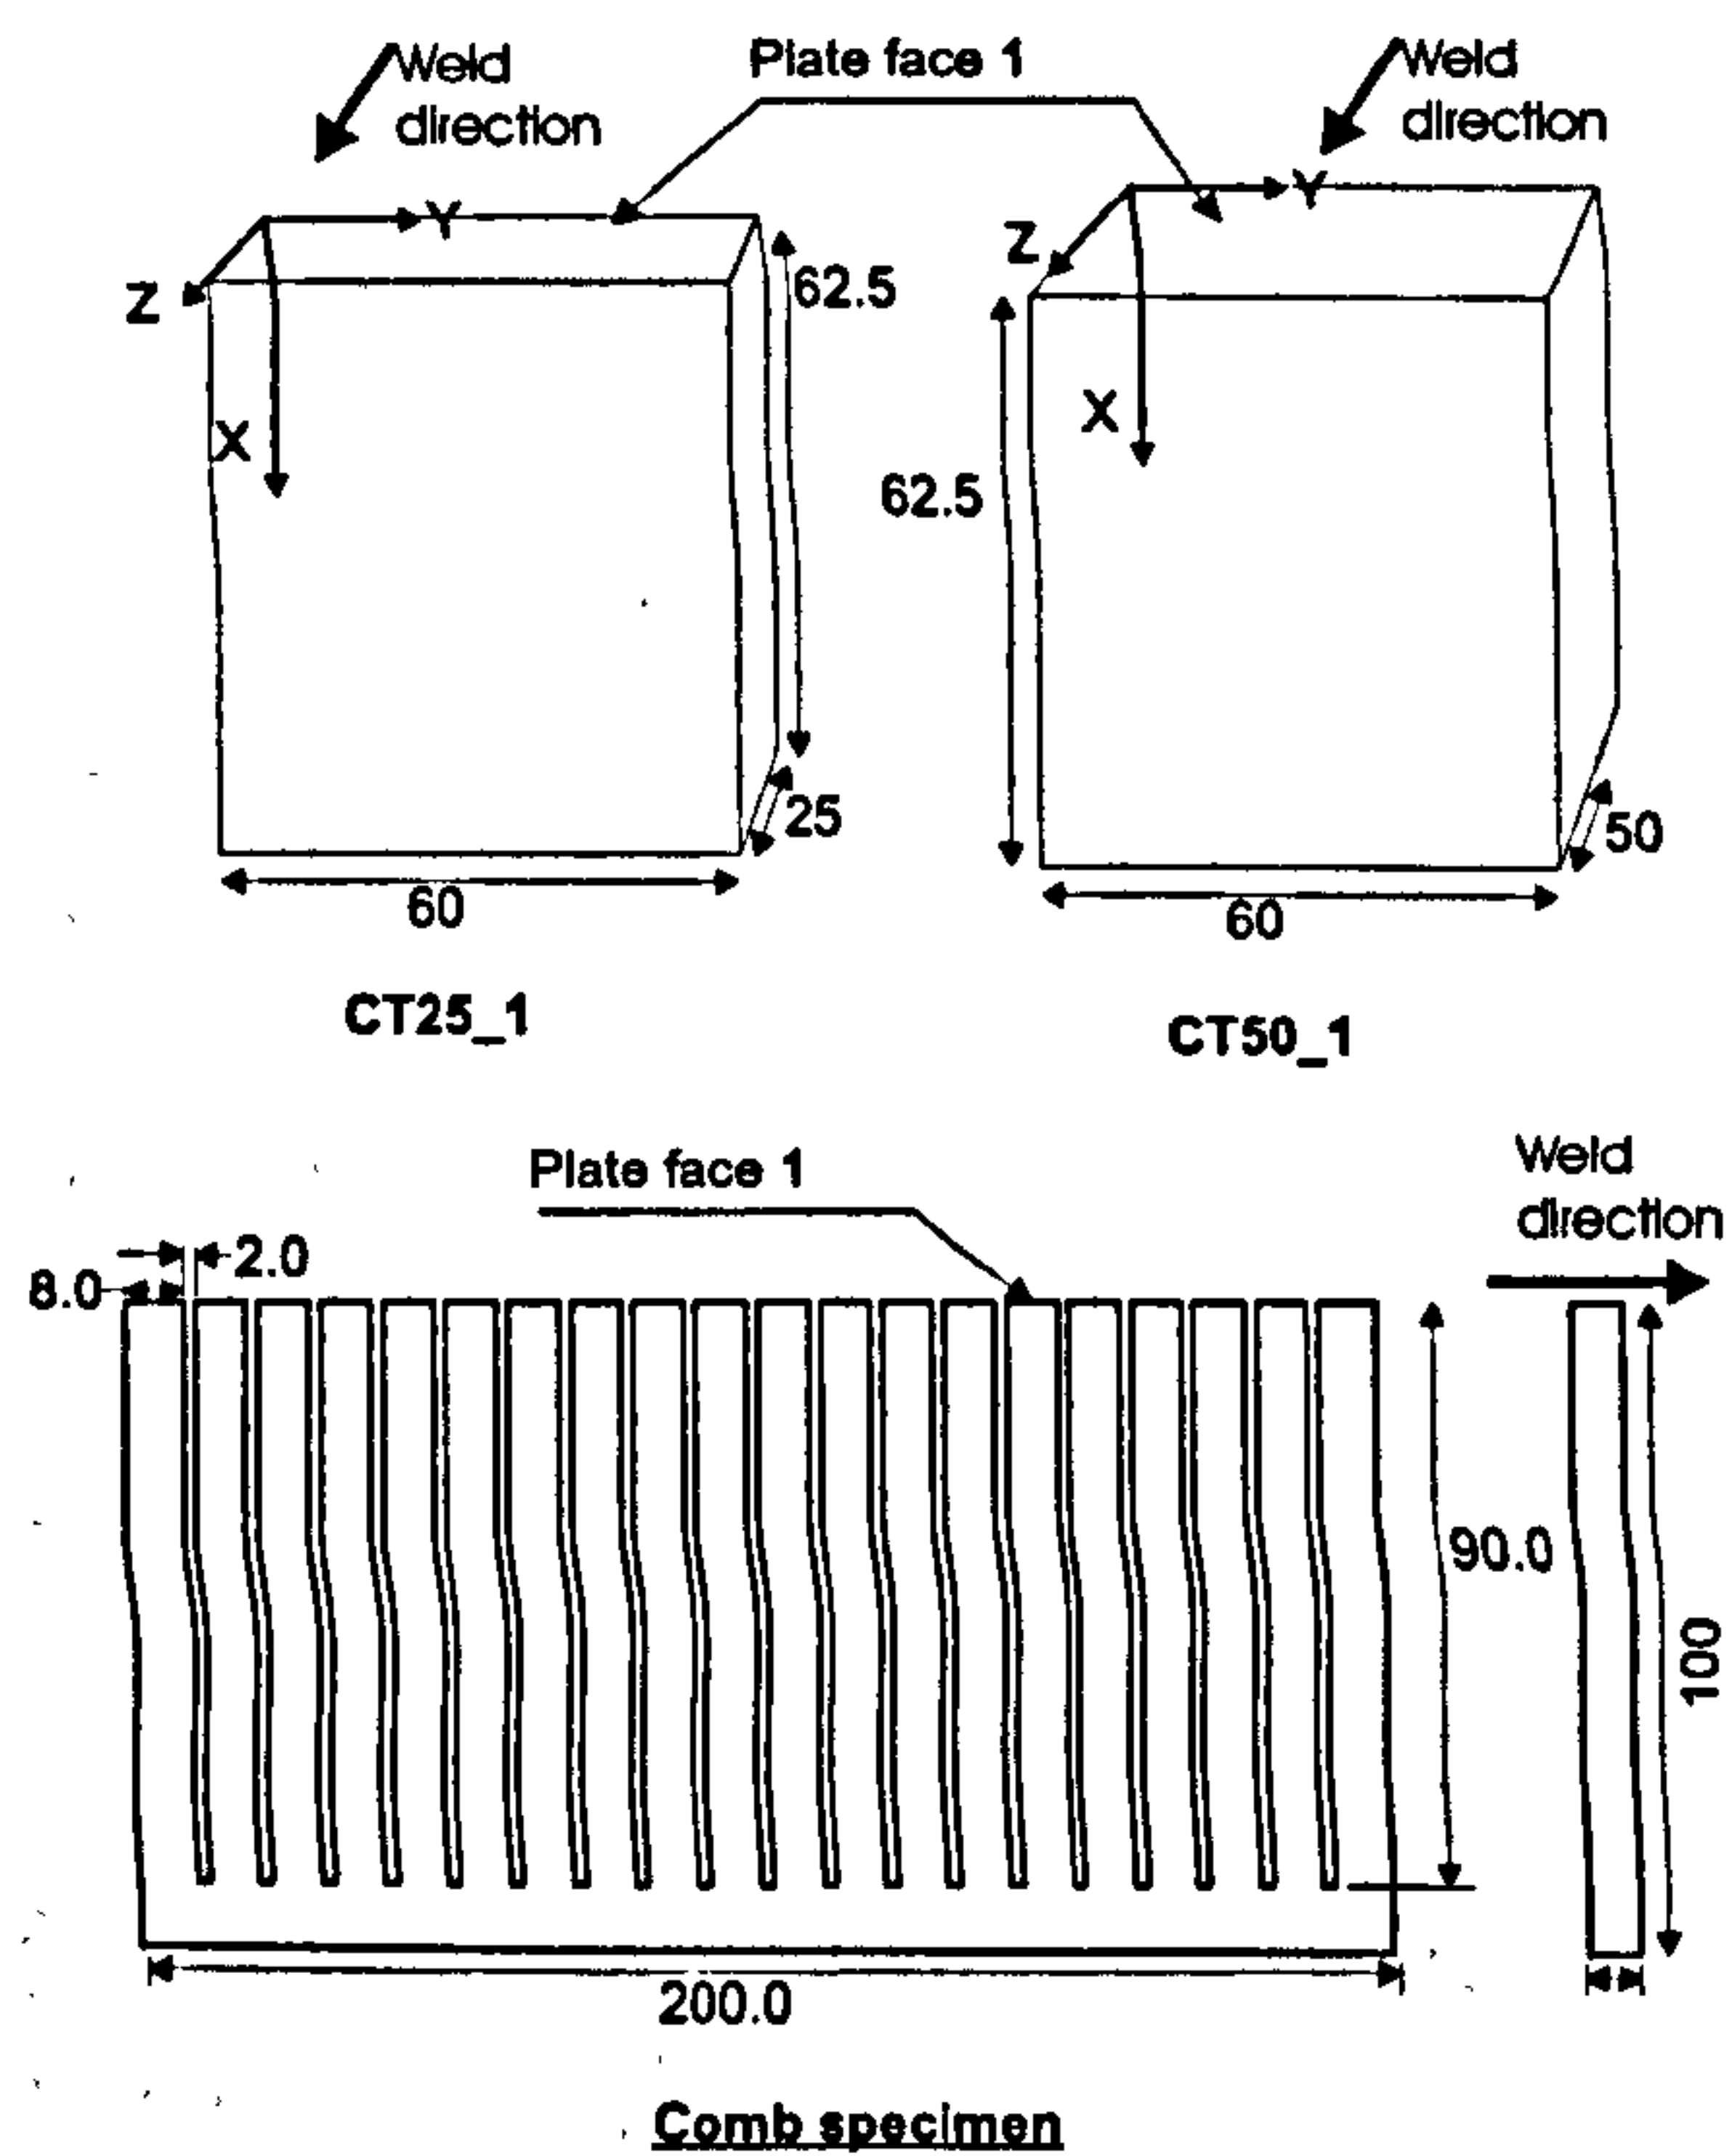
Geometry for extracted comb and CT blank specimens taken from the large repair welded plate of figure 3.2. Dimensions in mm.
